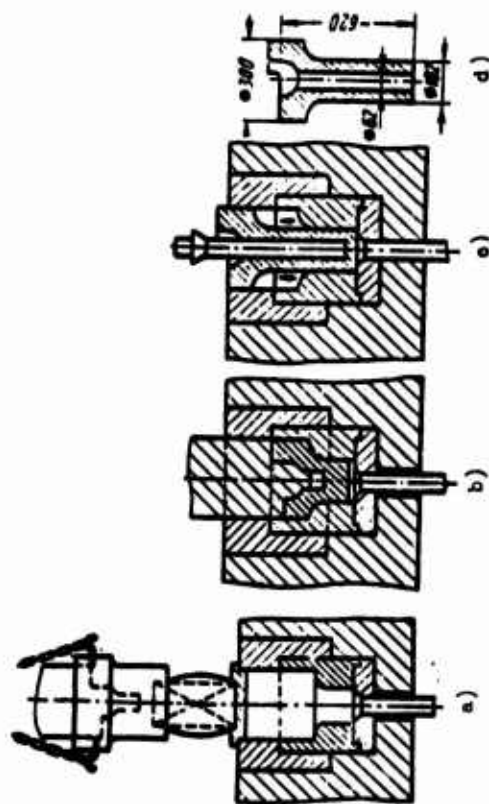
Diagram of stamping by piercing of bushing weighing 50 kg with a shaped head [31]: a) upsetting of the blank; b) stamping with preliminary piercing; c) final piercing; d) ready forging.
